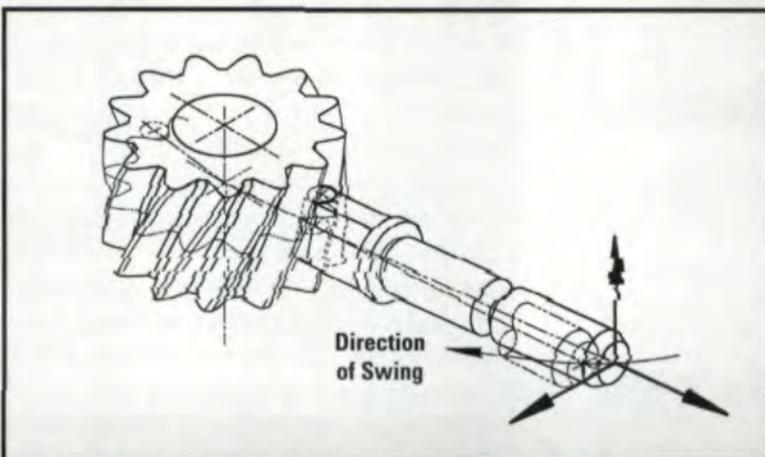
Direction of swing of right-hand anvil shaft. Left-hand anvil shaft swings the same amount in the opposite direction.
